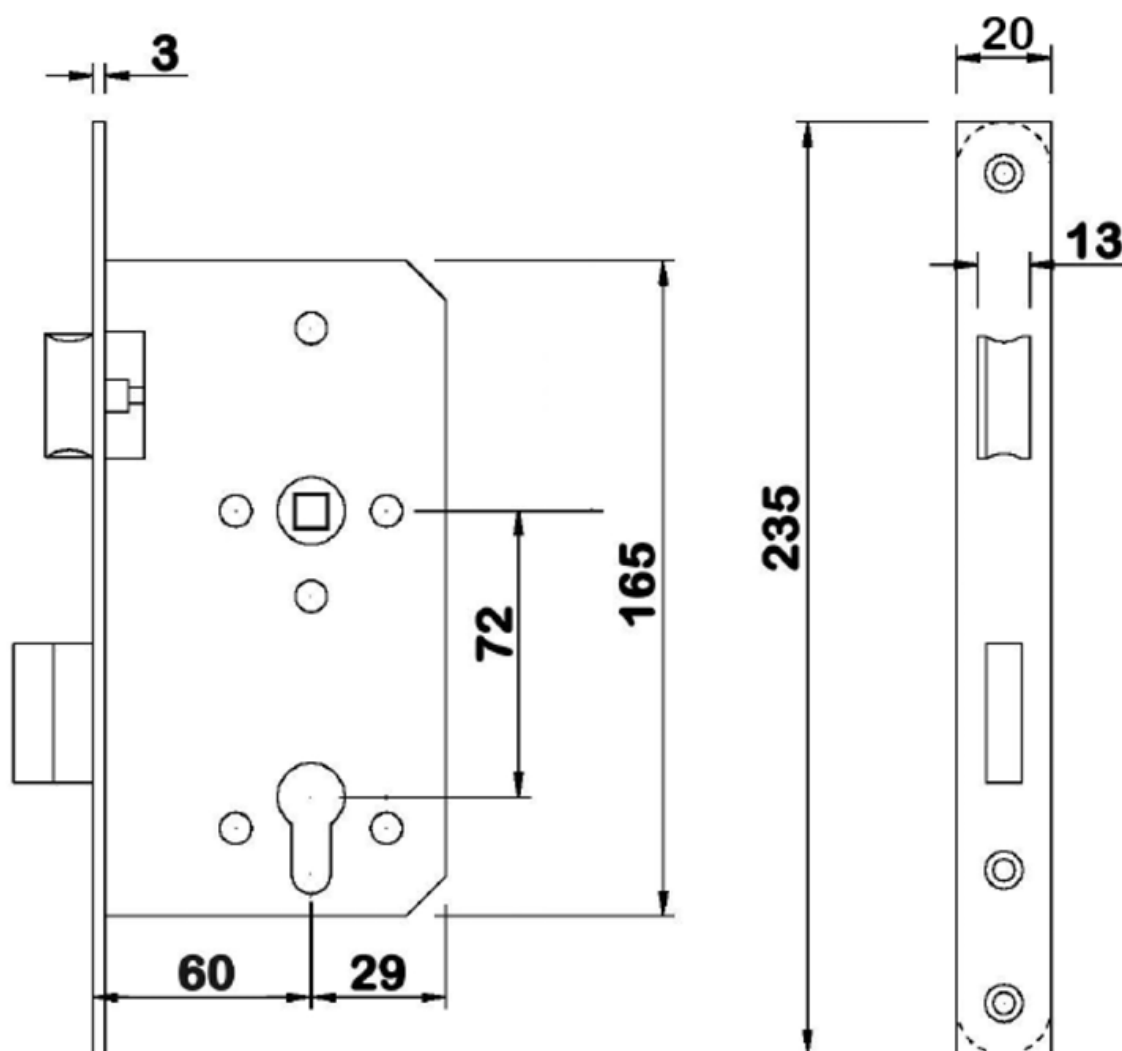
Item 14 – Consort CH7260FR Lockset Drawing
